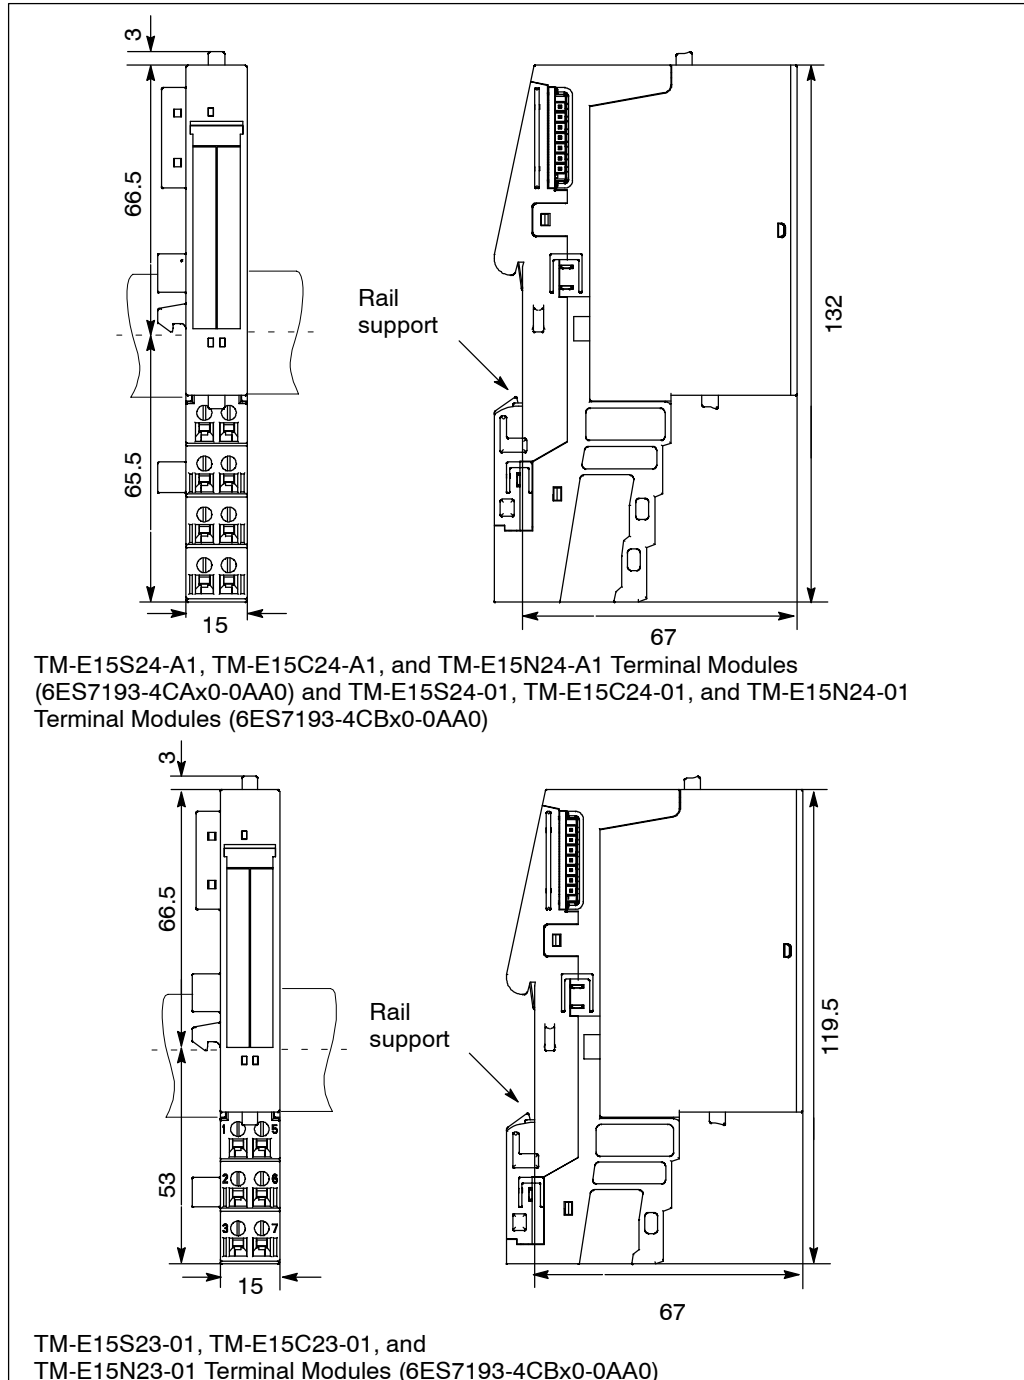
Dimensioned Drawing of Terminal Modules (Screw-Type/Spring Terminals) with an Electronic Module Inserted
